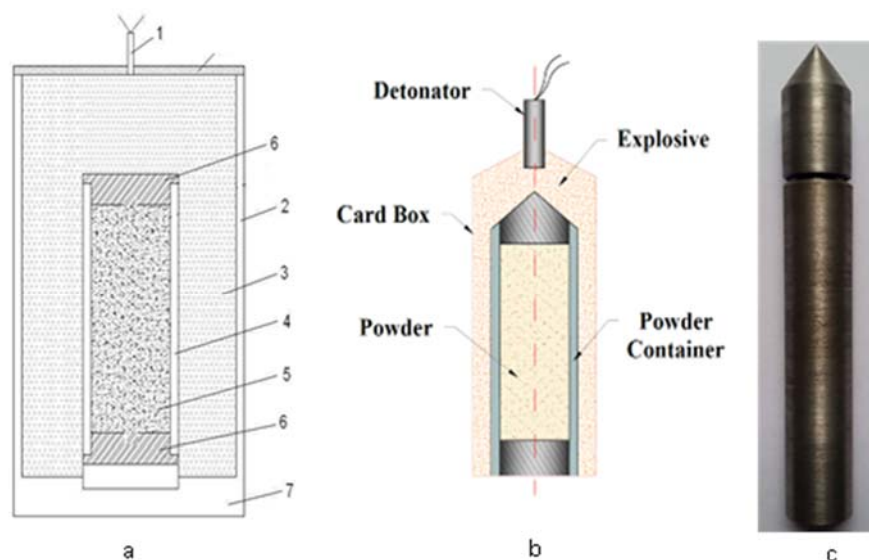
a) Schematic view of assembly for fabrication bulk rod: (1) electrical detonator, (2) explosive's container, (3) explosive, (4) steel tube, (5) reaction mixture, (6) steel plugs, (7) base table, (8) detonator seizer;
